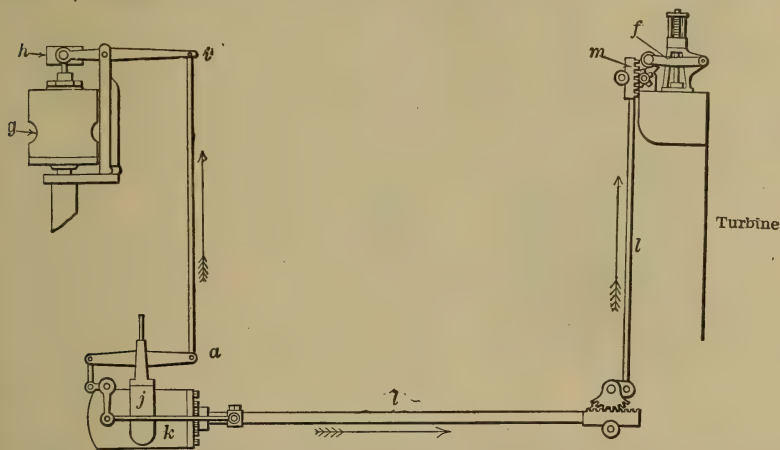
Diagrammatic Arrangement of Hydraulically Operated Valve Gear, Curtis Turbine.
